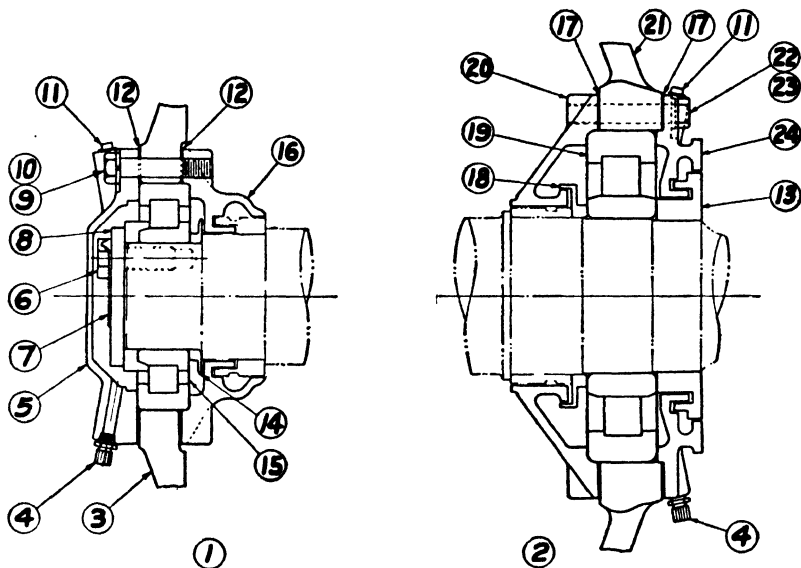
Bearing Assembly, Traction Motor, Type GE-731
